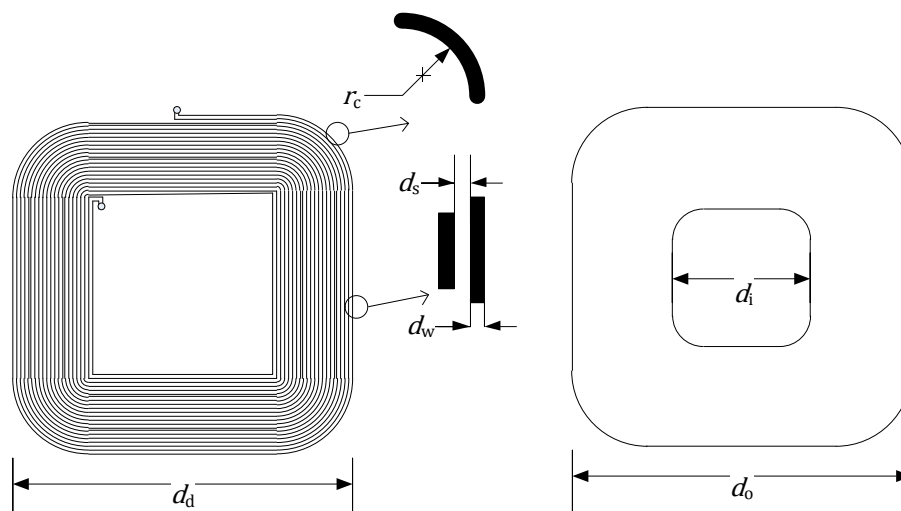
Top view of PCB and wire-wound Primary Coil of Power Transmitter design B4
